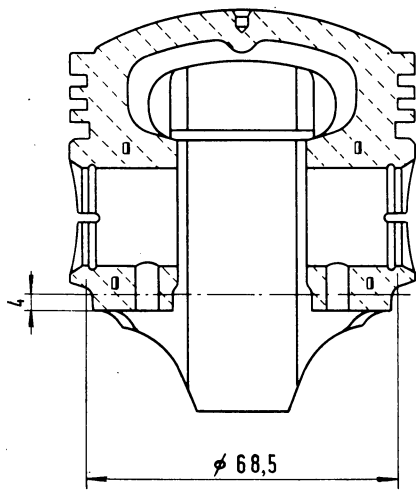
Milling diagram to equalize the weight in the same set of four pistons (engine 115 C.005).
